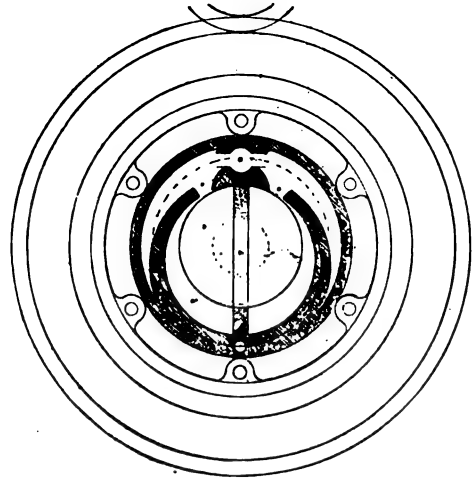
HYDRAULIC CAR GEAR—END VIEW.
